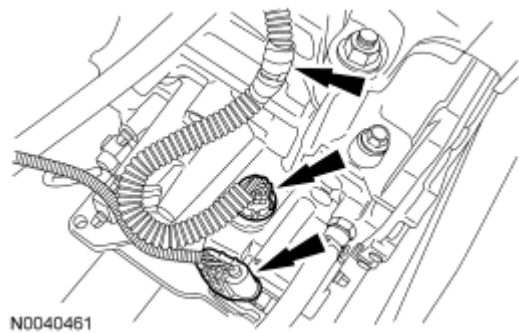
Locating Transmission Range (TR) Sensor Electrical Connector, Transmission Main Valve Body Electrical Connector
